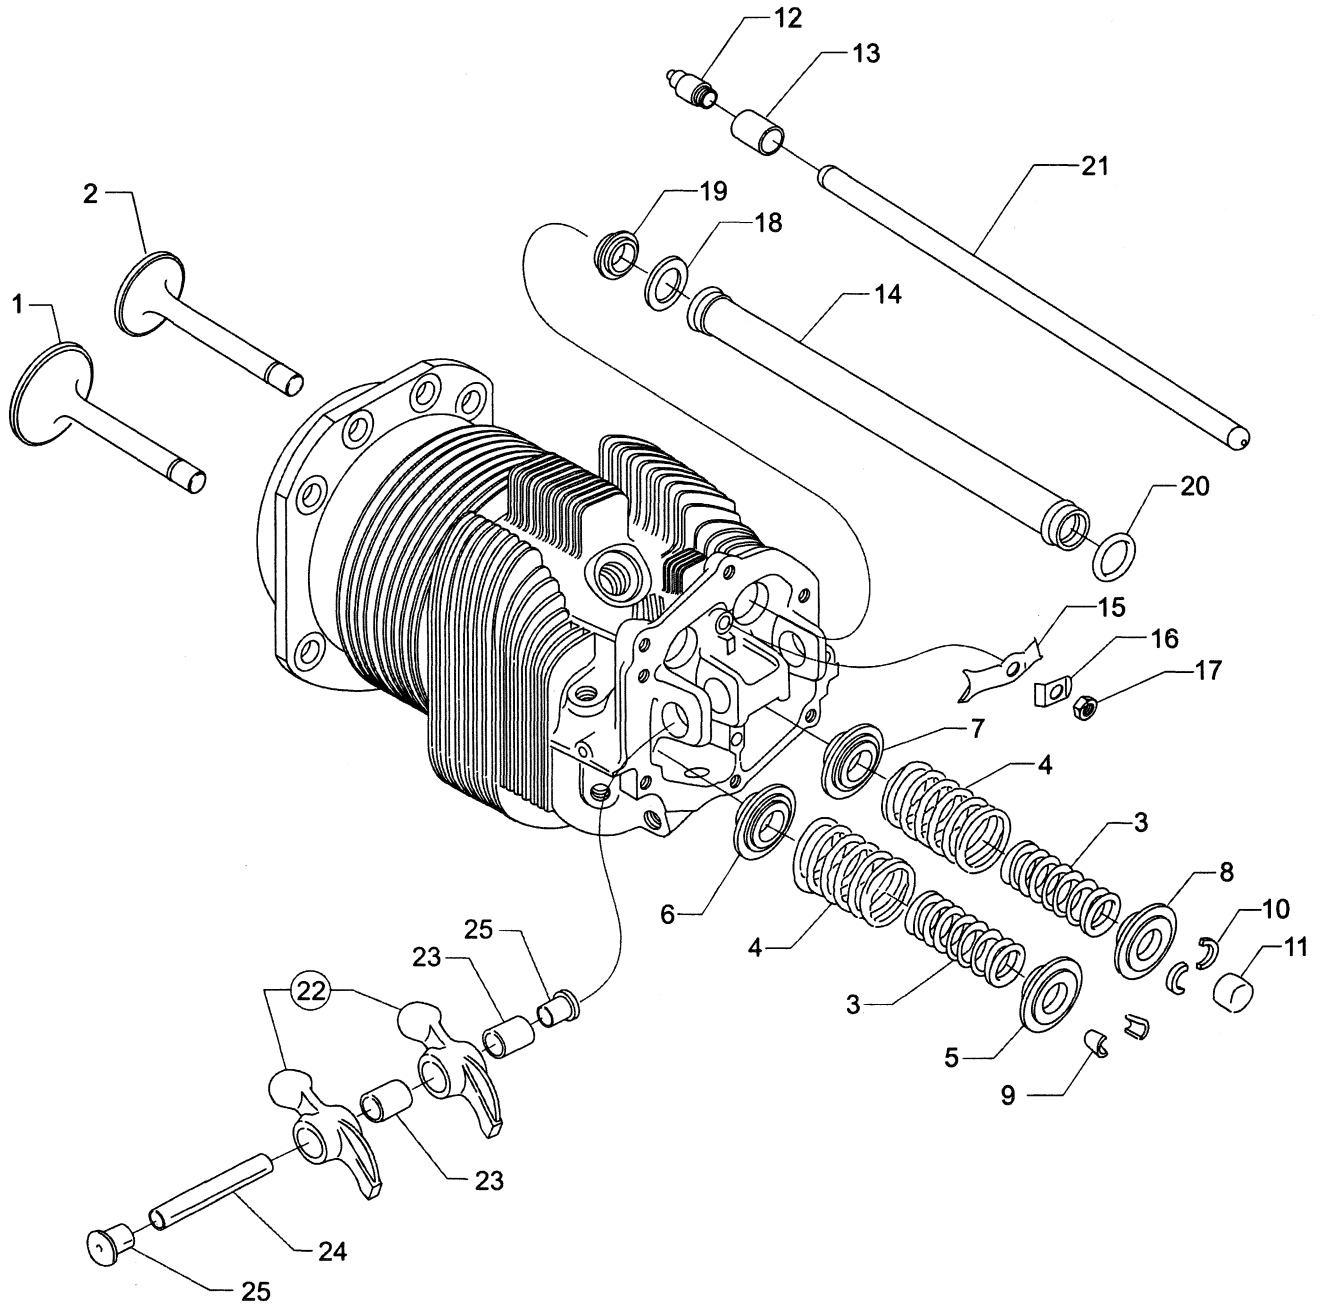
VALVE ASSEMBLY AND RELATED PARTS
